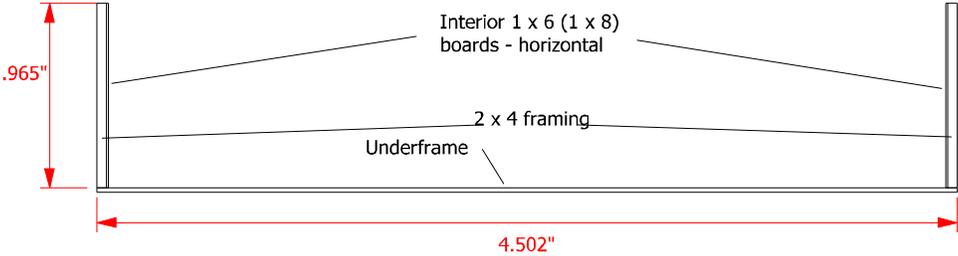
Drover Caboose side view - dimensions expressed in 3 decimal places
